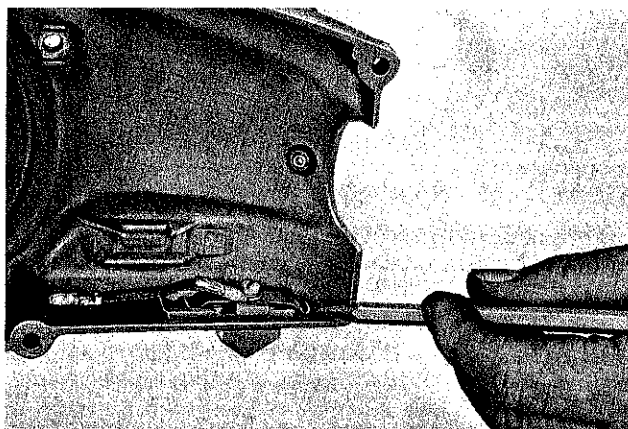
Make sure that the switch contact grounds on the fan housing metal when the switch is moved to the "off" position. Note the stop-switch wire assembly. The fan housing should not be pulled away from the engine while this wire is still connected to the coil.
